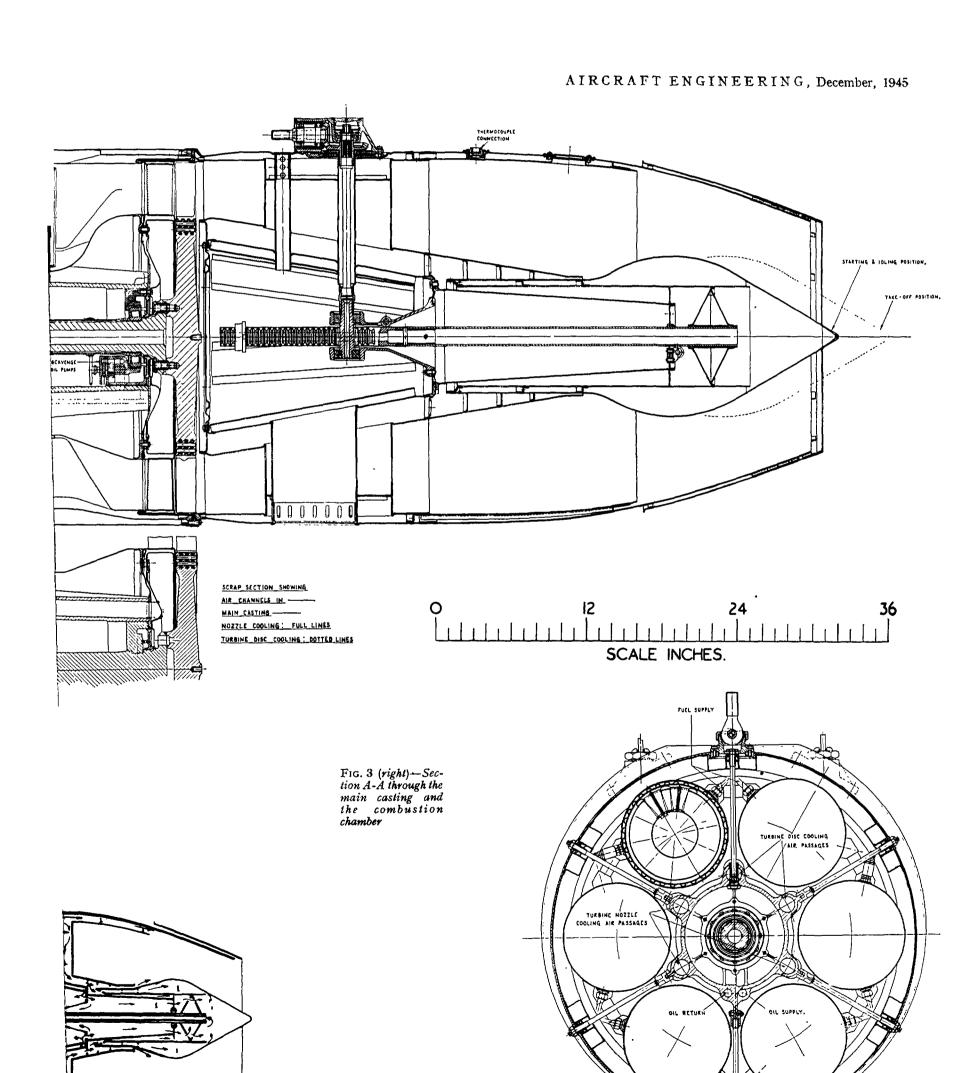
(right)—Section A-A through the main casting and the combustion chamber
